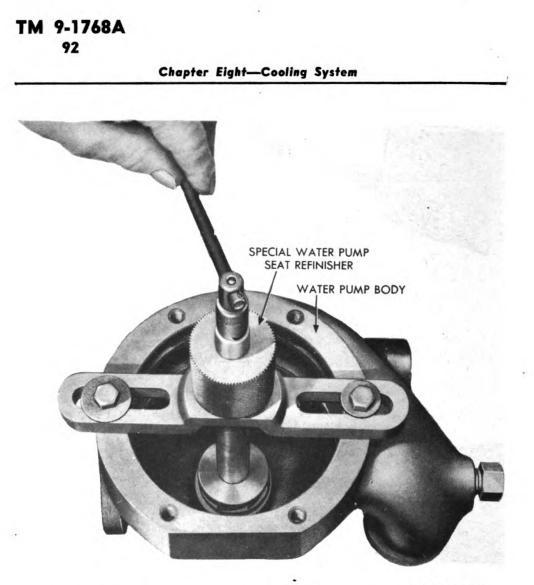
Refacing Seal Washer Seat in Water Pump Body, Using Special Seat Refacer (41-T-3095-500)
